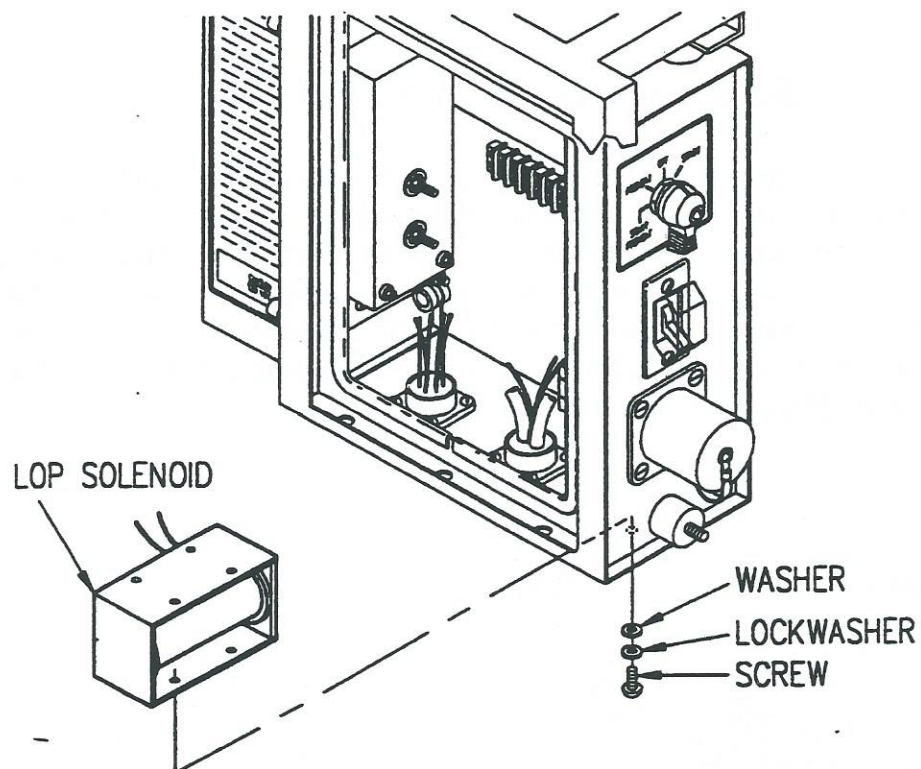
Low Oil Pressure (LOP) Solenoid Assembly
